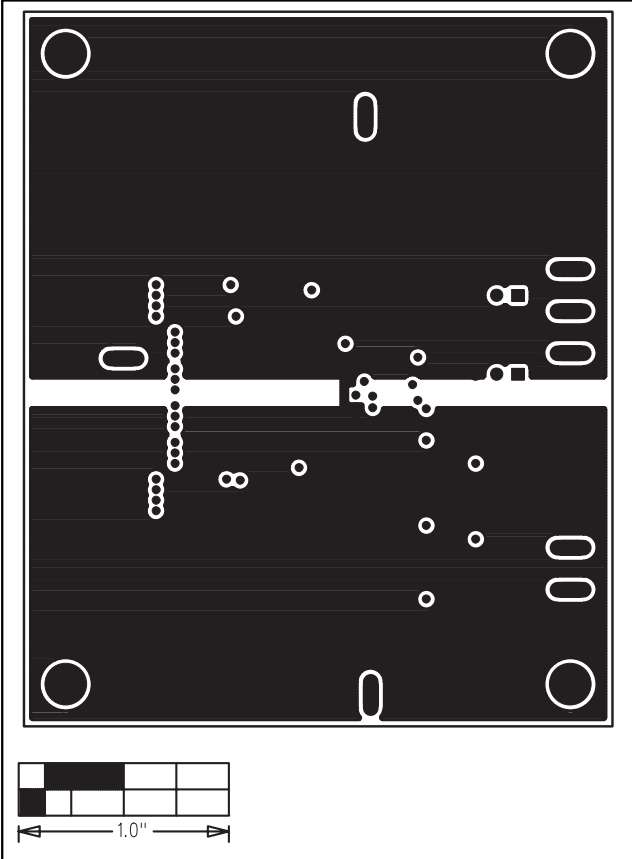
MAX1858 EV Kit PC Board Layout—Ground Layer 2
